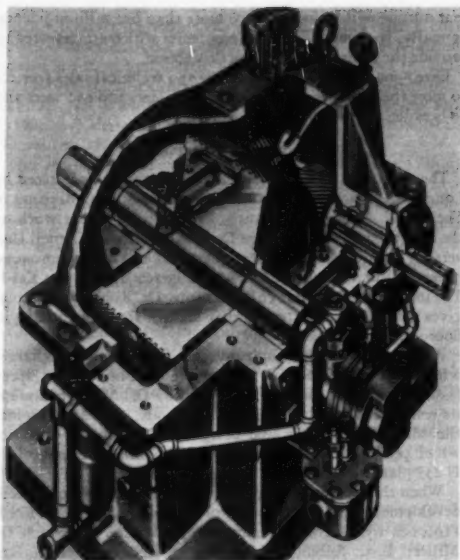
COMMON TYPE OF HIGH-SPEED GEAR DRIVE
